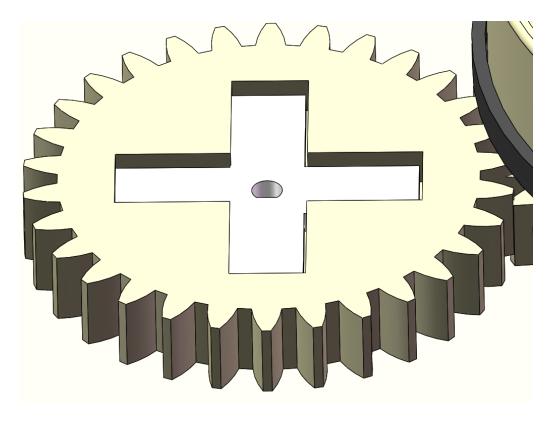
Special Consideration in our Design to avoid accidental slipping between driving gear and motor shaft (non-circular hole at center to connect the shaft of motor,non-circular connection between shaft and driving gear)
